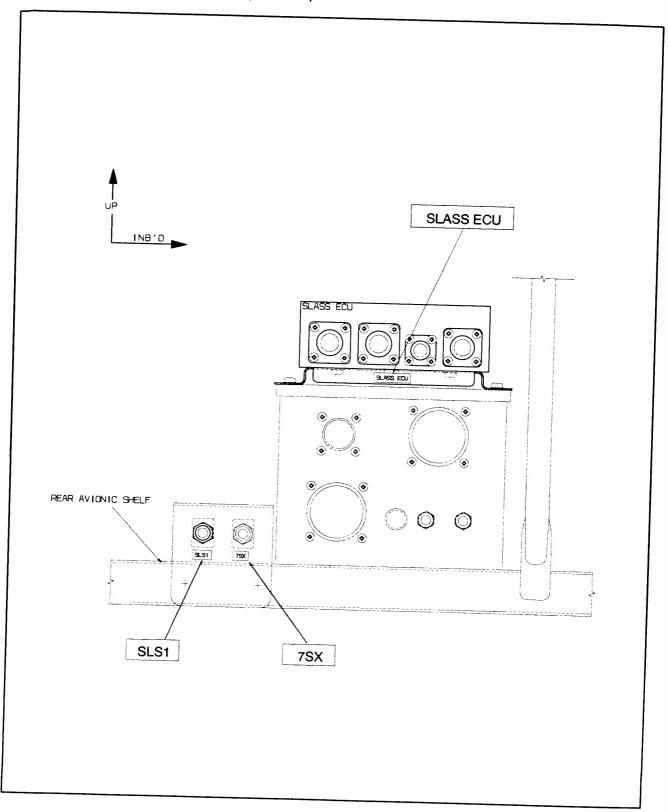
View showing label location on Circuit Breaker Holder for installation with SLASS
